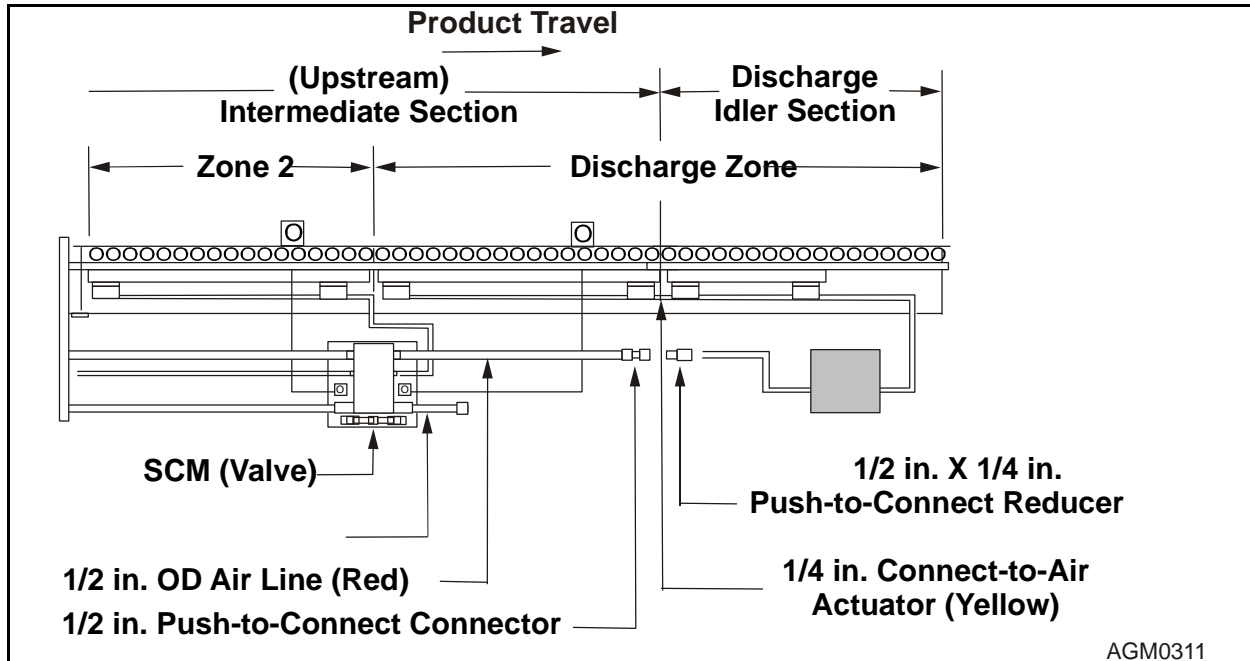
11 Operational Zone Control-Solenoid Valve Piping
